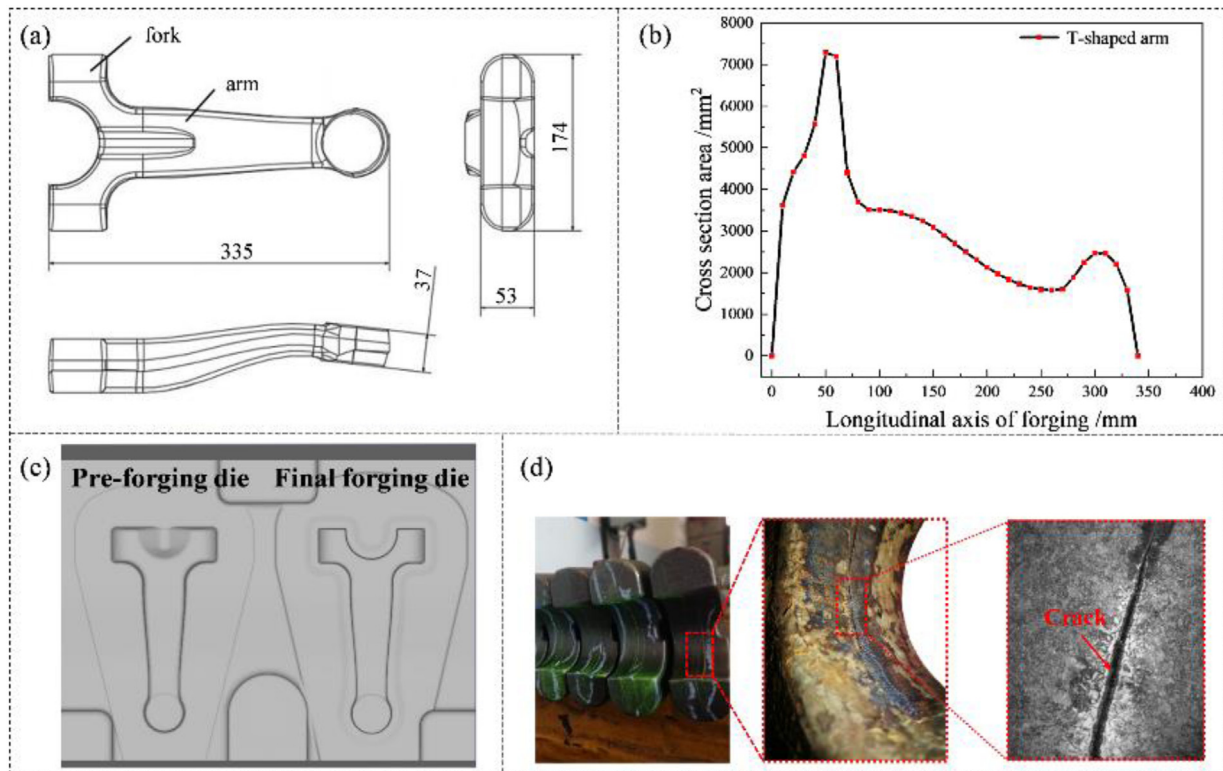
(a) drawing of the T-shaped arm, (b) the cross-sectional area distribution curve, (c) forging die and (d) crack defects after forging.
